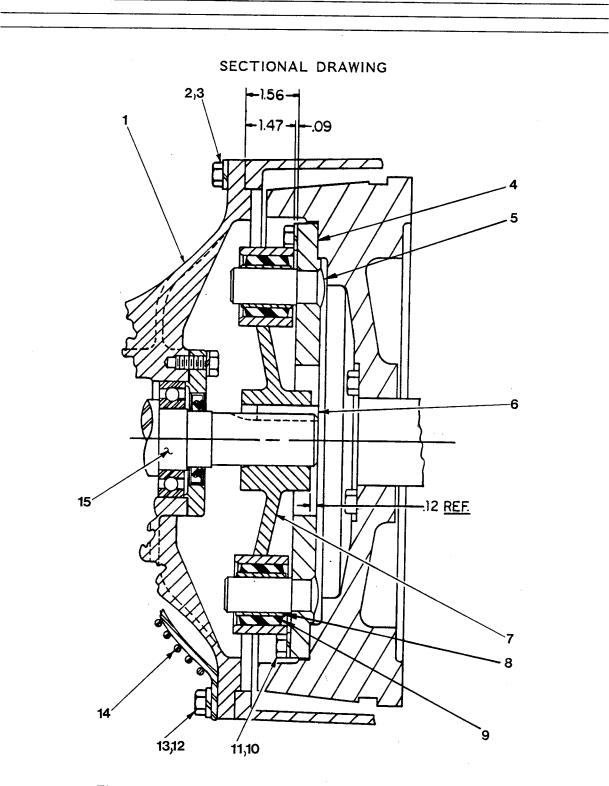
Drive Assembly For Pump Model 14C2-F3L
